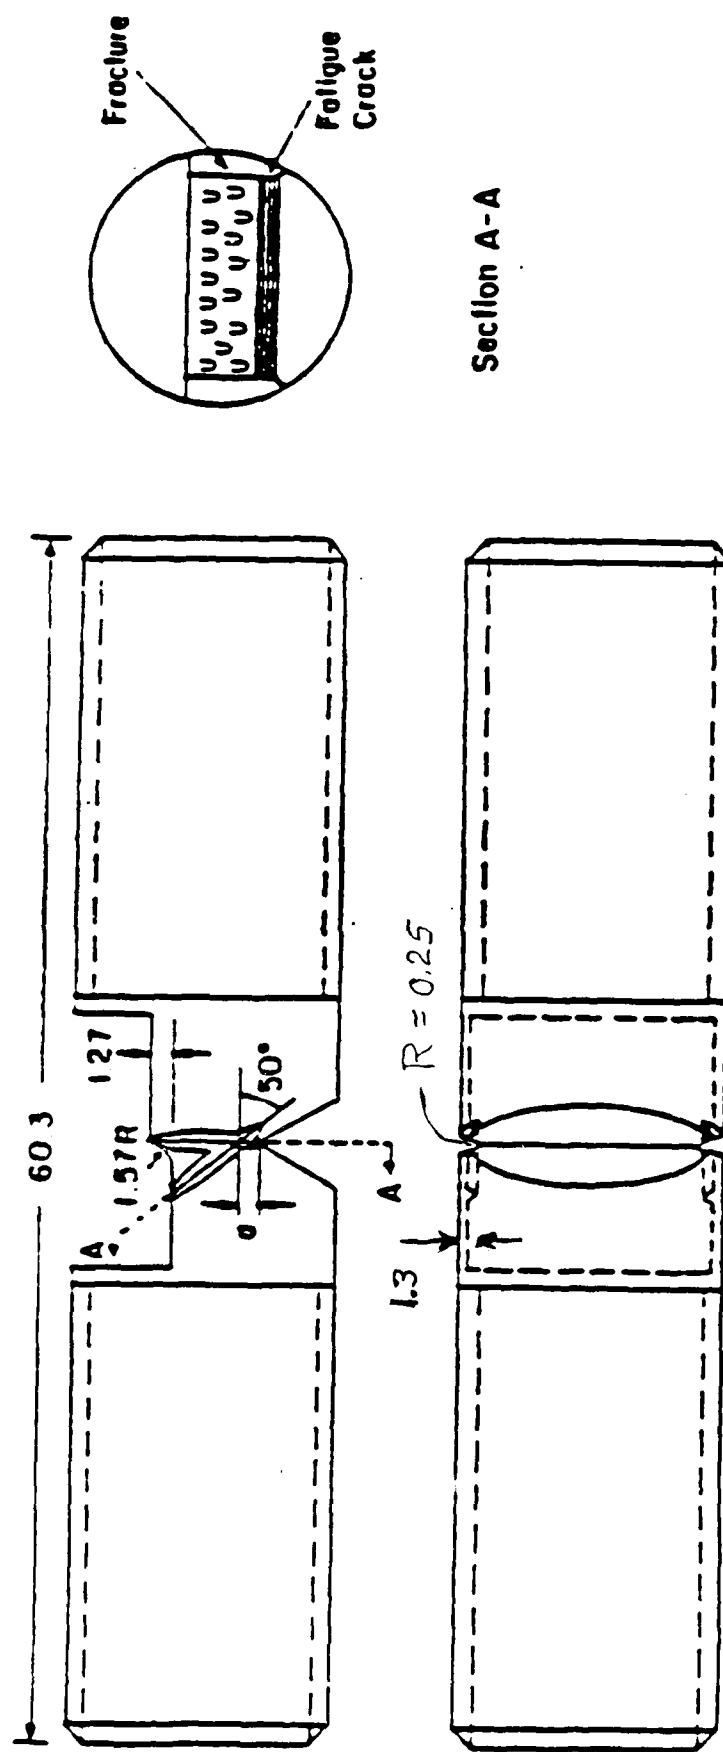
Second machining (after fatigue precracking) for the asymmetric specimens: a is the fatigue crack
